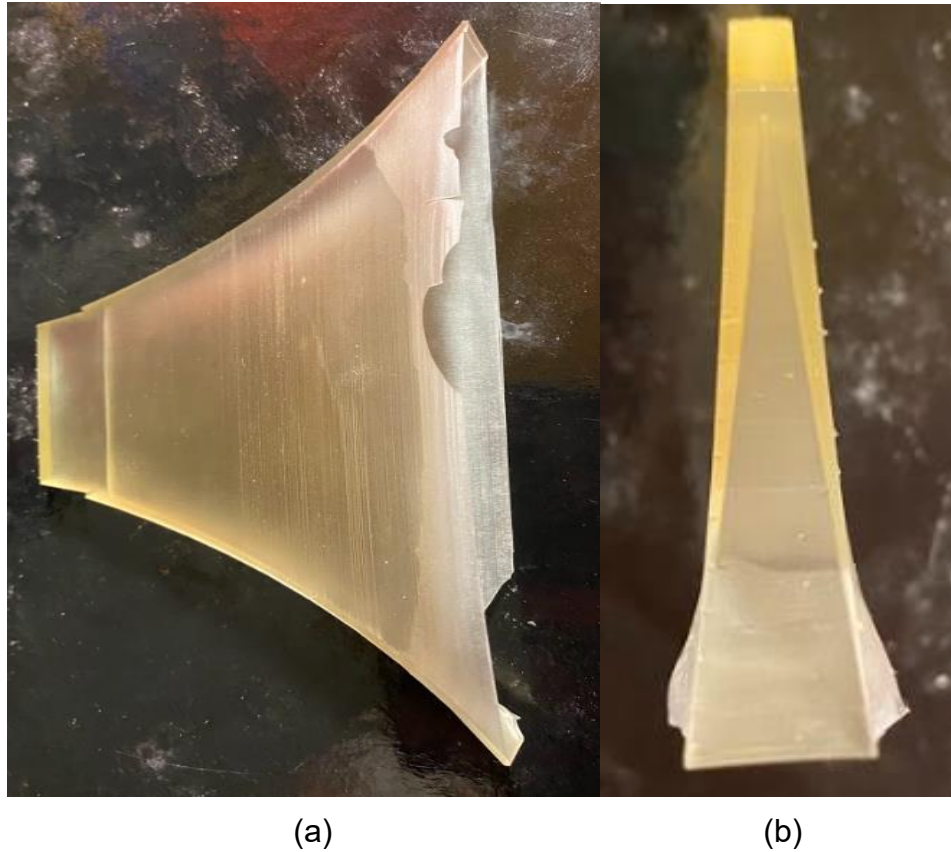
(a) Top and (b) side views of a resin partial dielectric impedance transformer printed using a SLA 3D printer.
